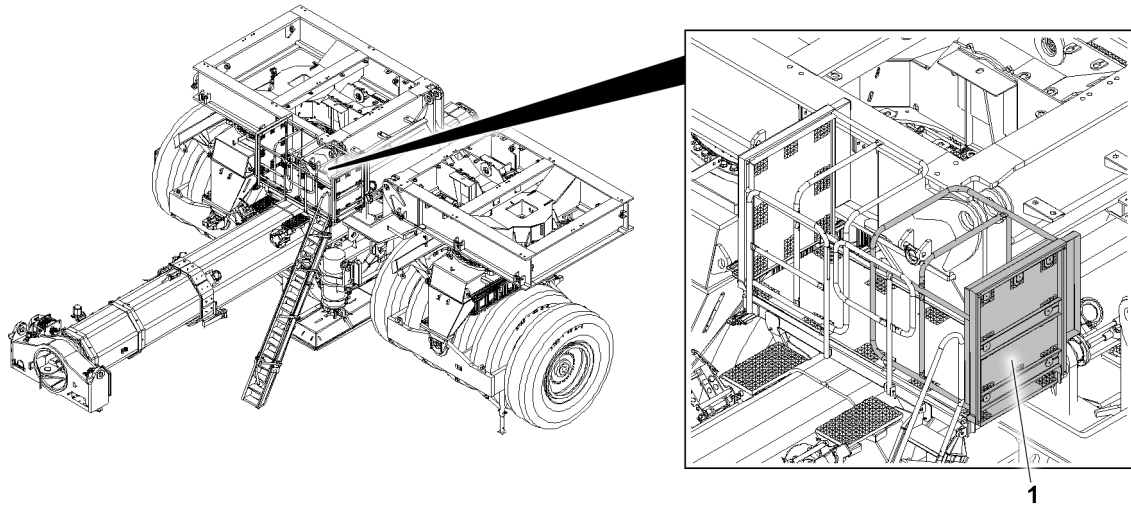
Assembling the platform in the operating position — fastening the platform to the auxiliary crane
